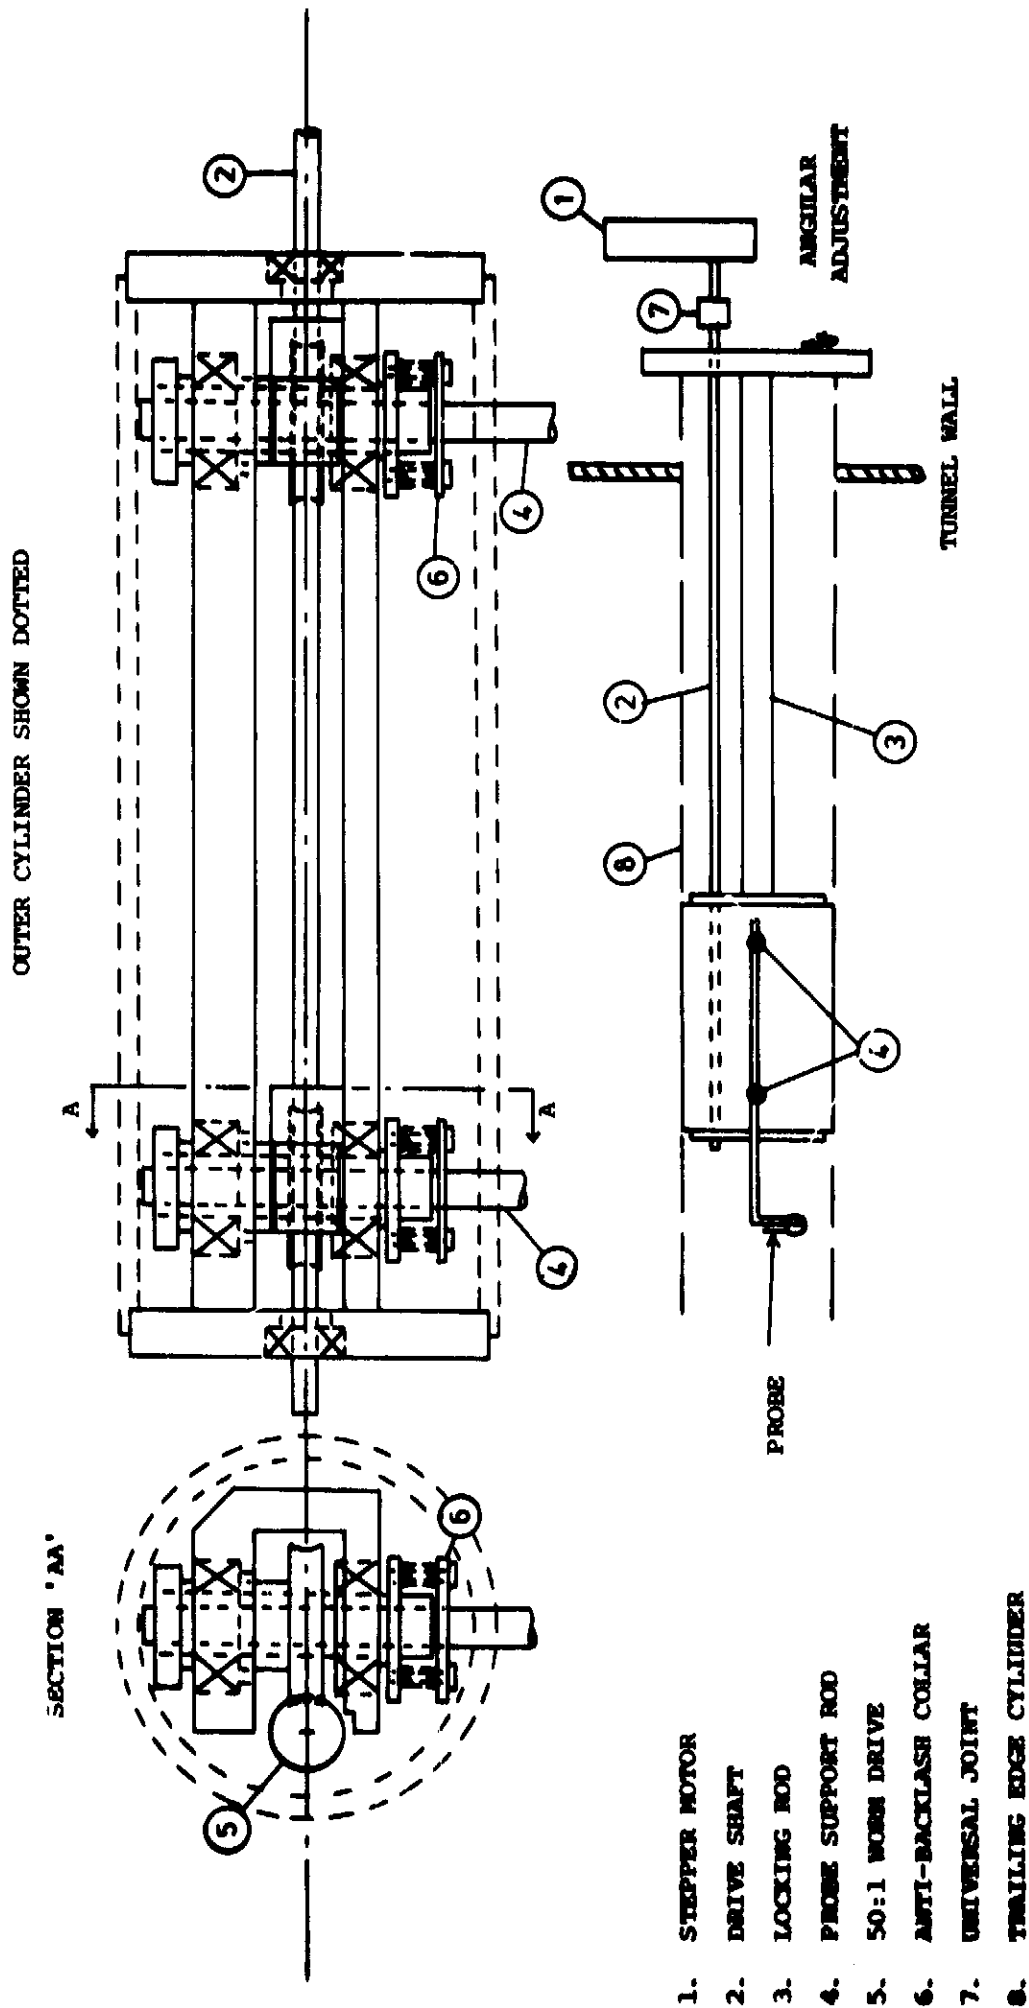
TRAVERSING GEAR ASSEMBLY
